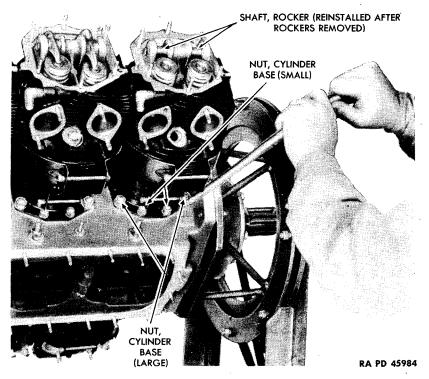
Removing Cylinder Base Nut, Using Wrench 41-W-872-375
